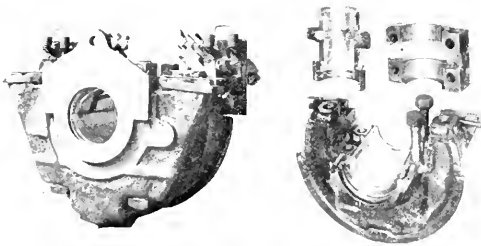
METHOD OF CHANGING MAIN MOTOR BEARINGS
